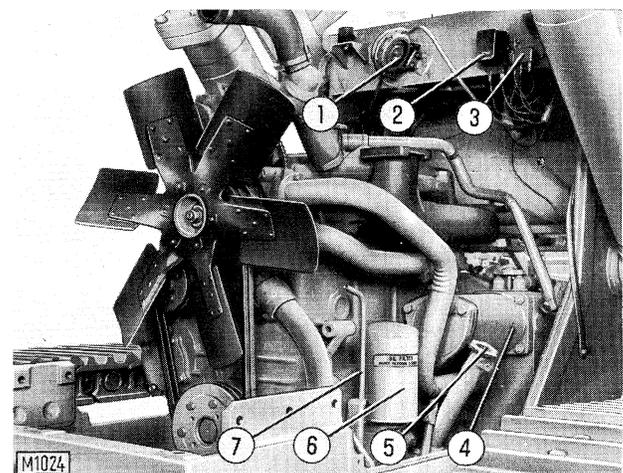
Side L.H. view of the engine in position on the machine
